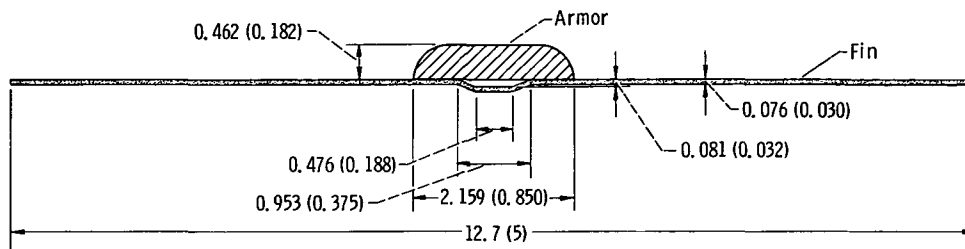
Channel-fin dimensions, primary radiator. Dimensions are in centimeters (in.).
